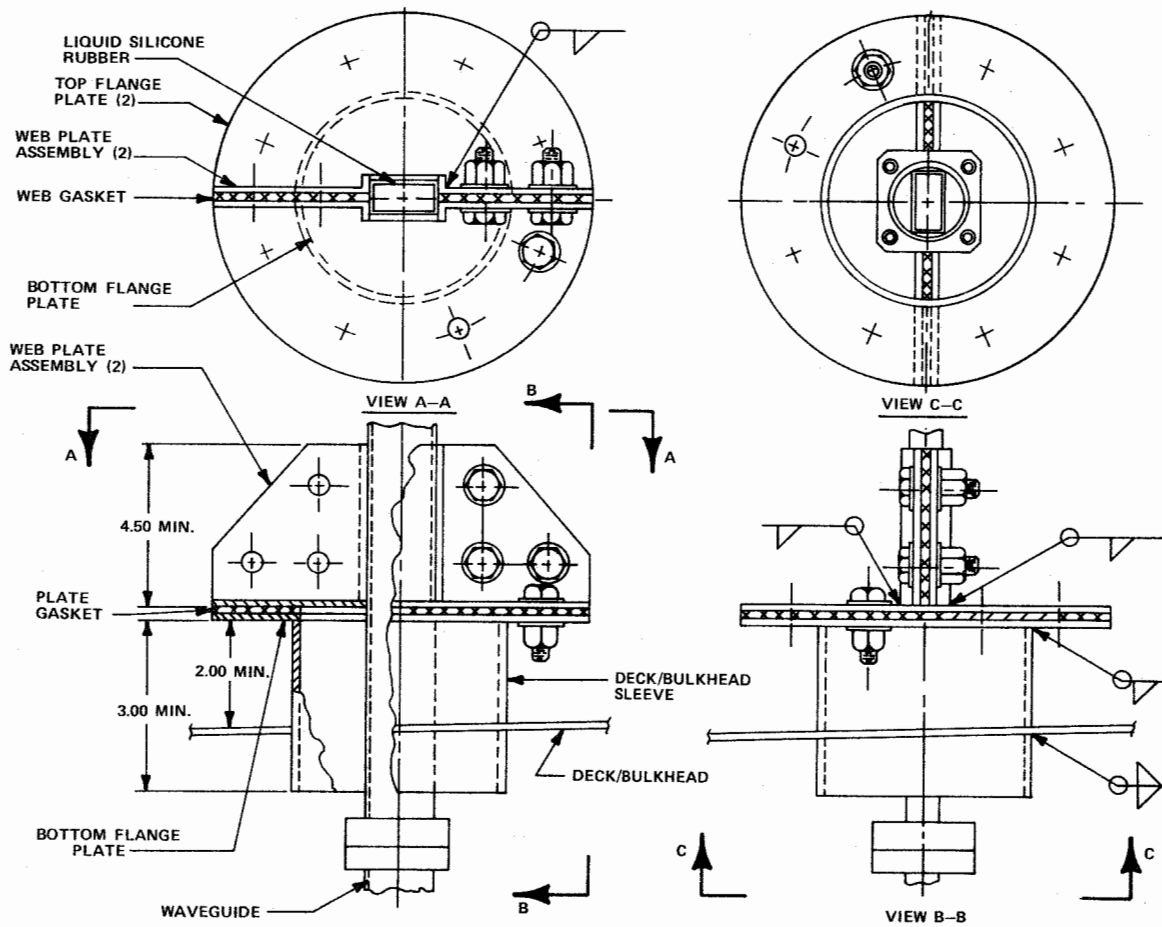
Typical Split Sleeve Assembly for Small Waveguide
